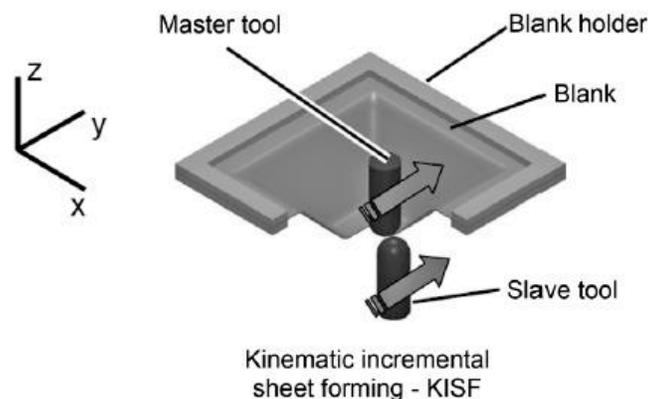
8 Kinematic incremental sheet forming using two forming tools (Altan).
